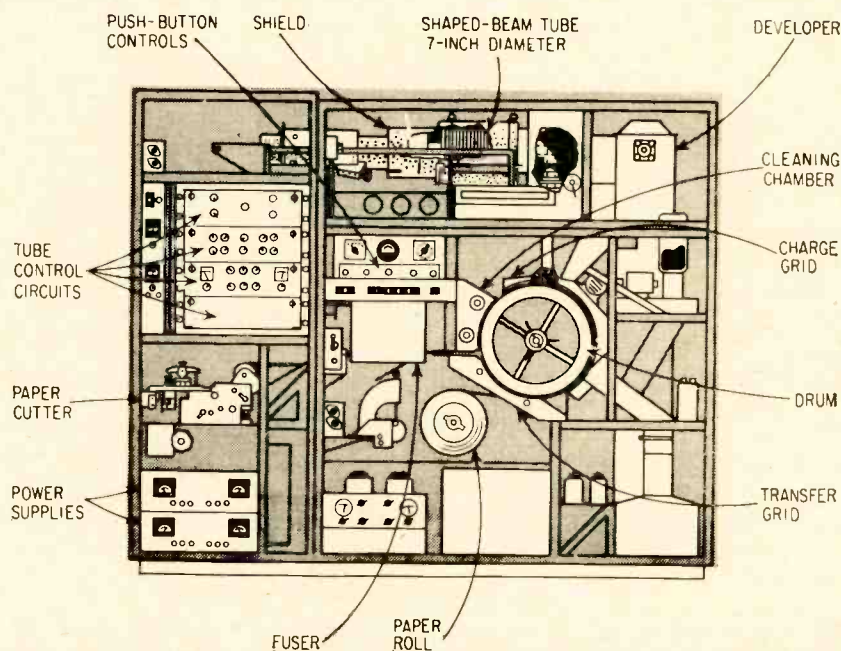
Cross sectional view of the high-speed electronic printer shows the physical configuration of the complete system
